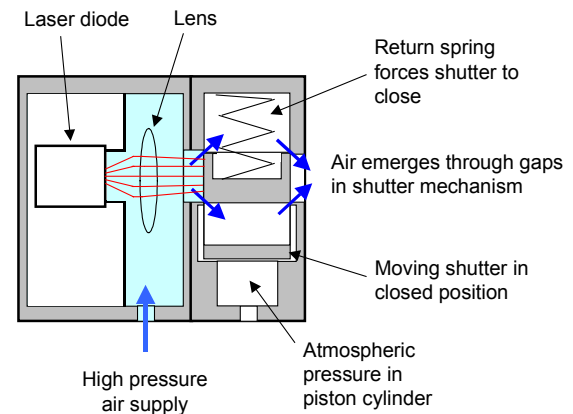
during machining, conventional laser tool setters are protected by a moving shutter and a continuous air 'bleed'
